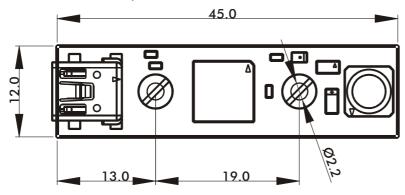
Mechanical dimensions of the Oak Tilt sensor
